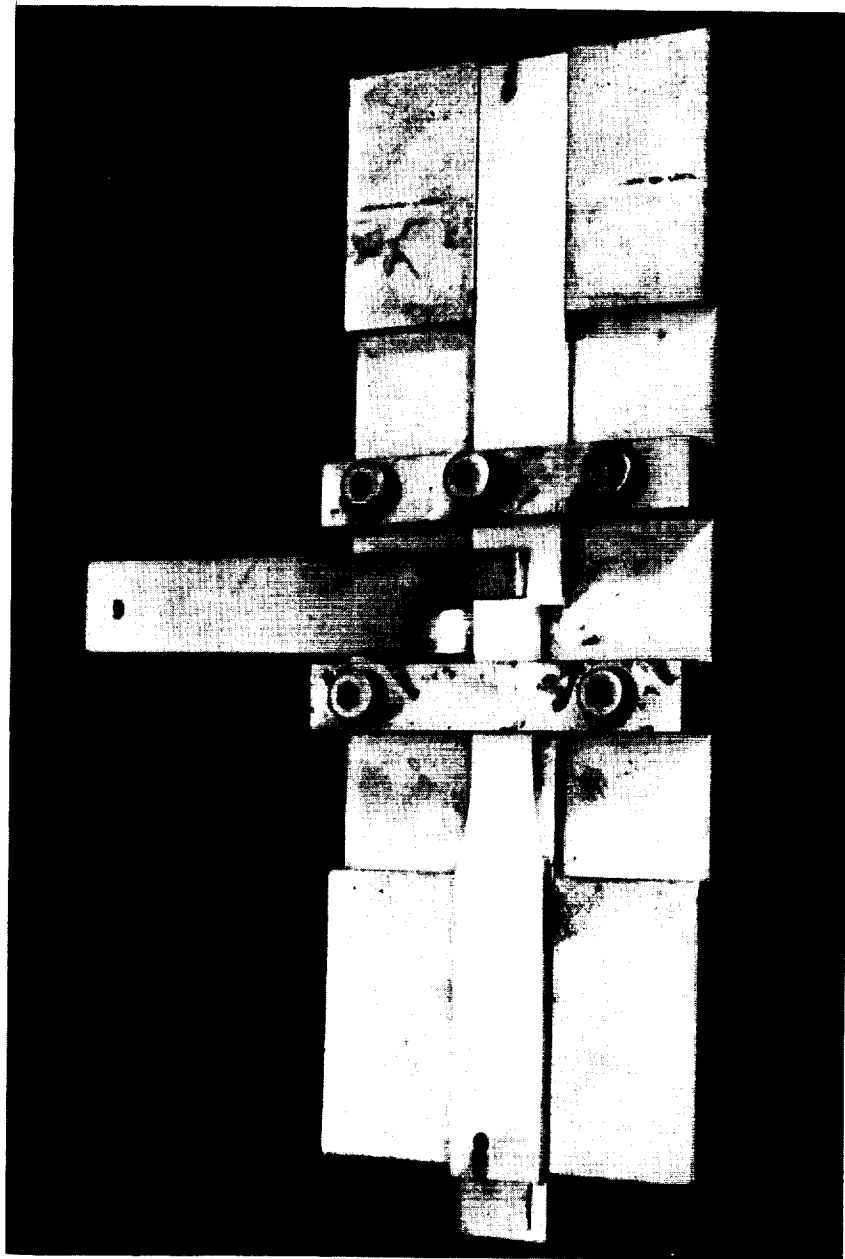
BRAZING FIXTURE AND SPECIMEN SEGMENTS.
